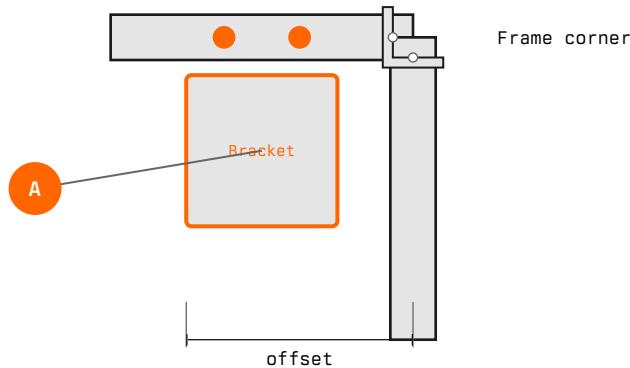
Motor bracket position at frame corner. All 4 corners mirror this layout.
